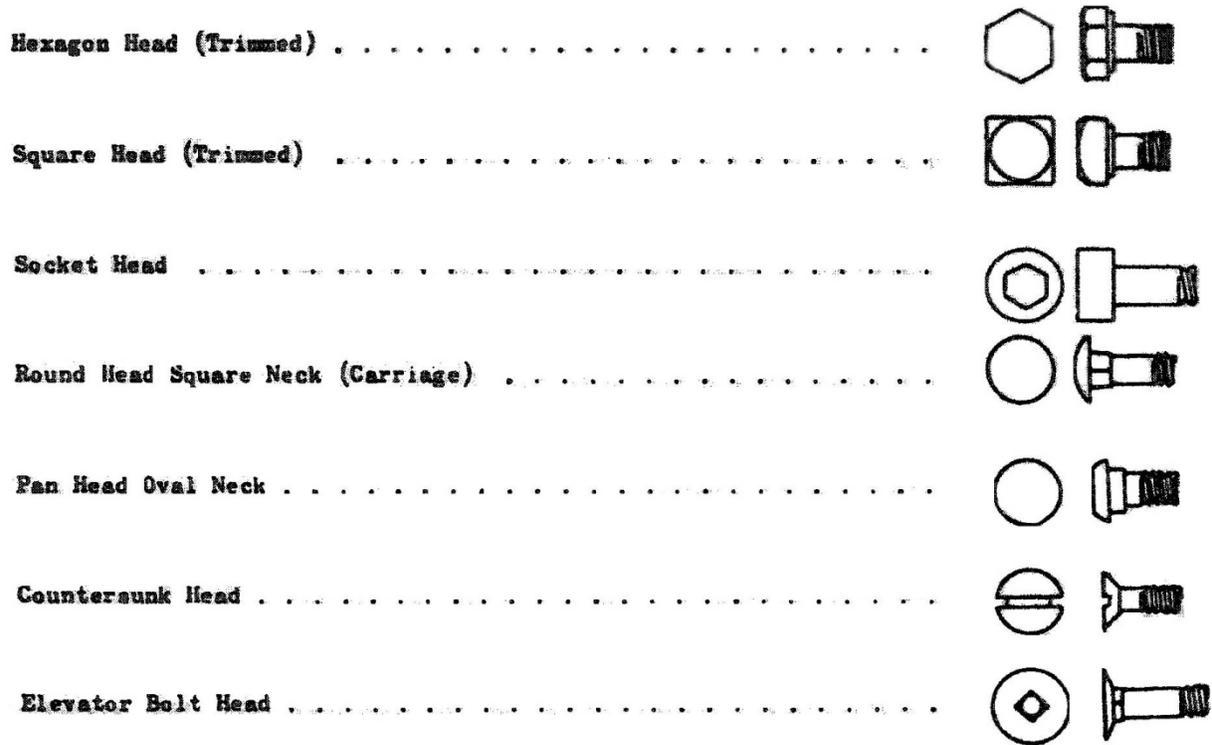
Fastener Head Styles: Bolt and Cap Screw Heads (Sheet 1 of 3)
